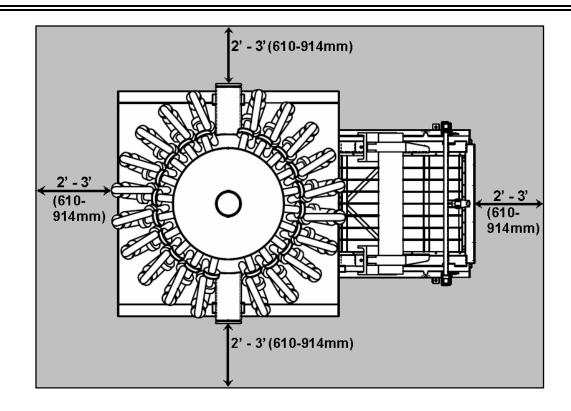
Recommended Clearances (Shown With Optional Desilter)
